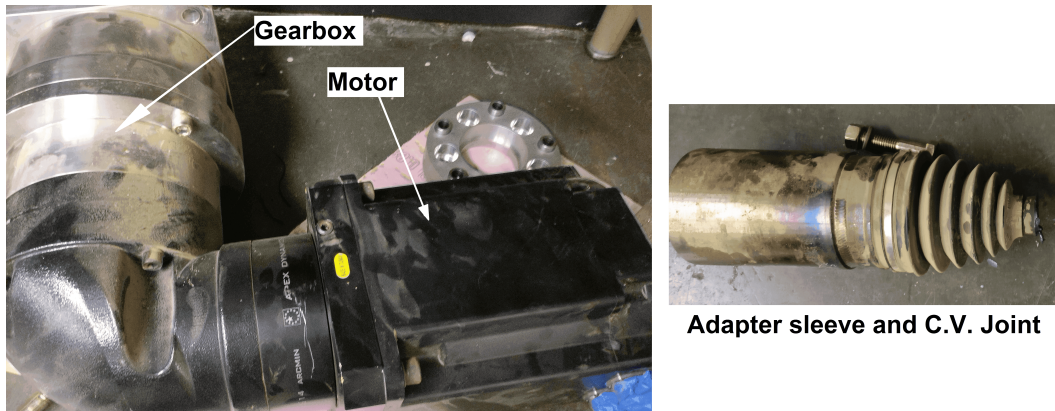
Disassembled gearbox & motor, adapter sleeve and C.V. joint
